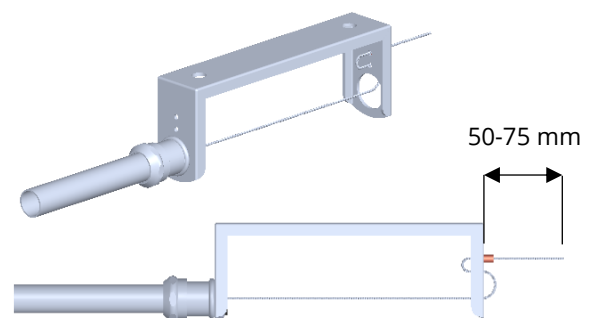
Leave 50-75 mm when crimping the stop sleeve. Afterwards, the wire can be cut closer to the sleeve.
